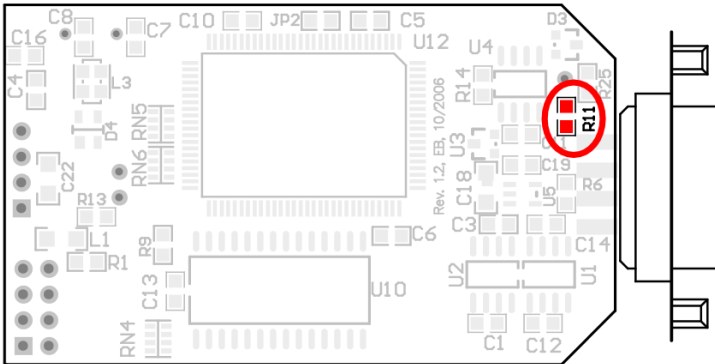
Bottom side of the PCAN-USB opto-decoupled board (IPEH-002022), solder field R11
